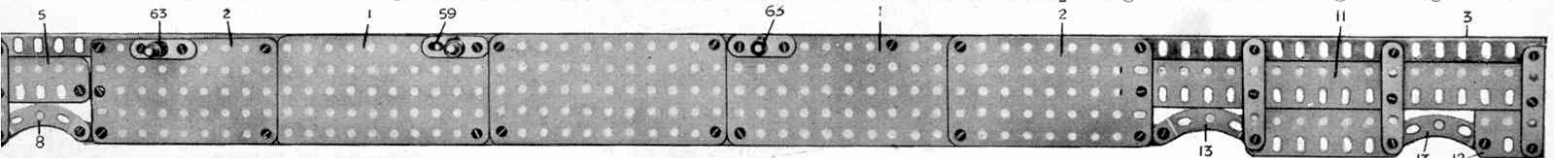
Left-hand Frame unit, showing bearings for driving wheel brake arm pivots
